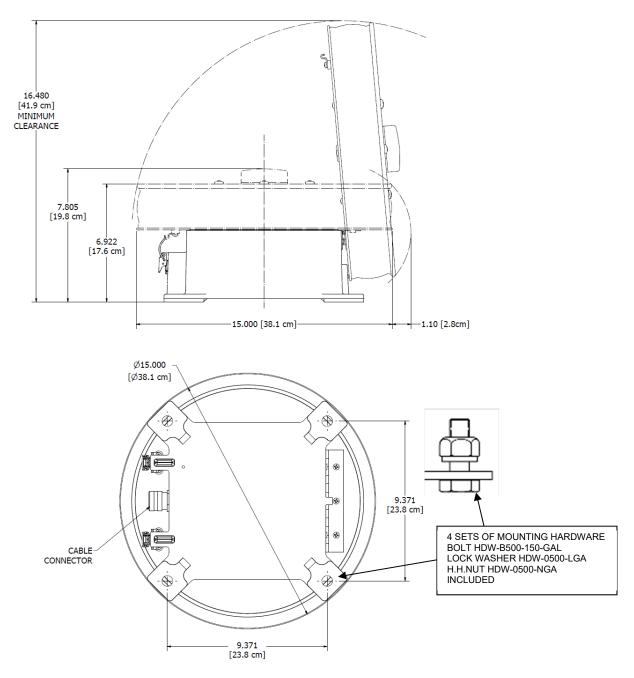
IFH-1910-0IR Flash Head Dimensions and Mounting Detail
